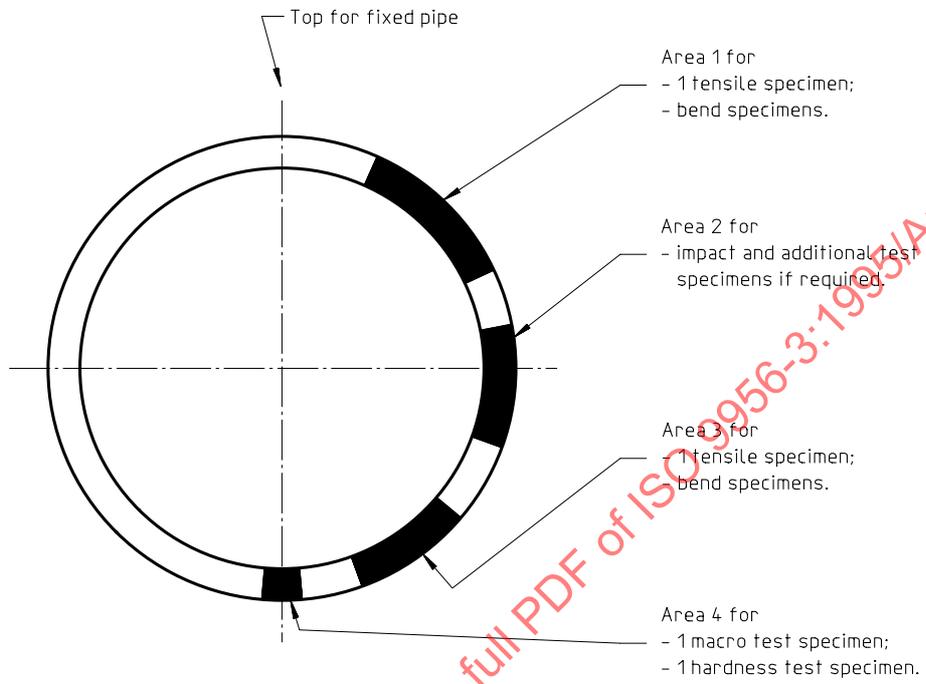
Location of test specimens for a butt weld in pipe
